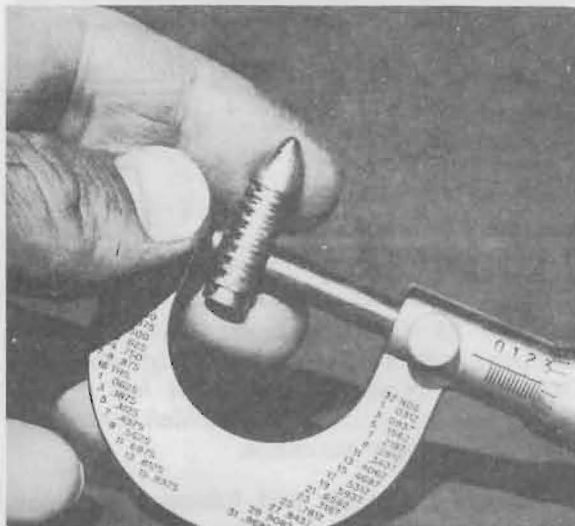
Bullets should be miked after coming out of the mold. Reducing diameter by more than .003" in the die will probably distort the bullet and ruin accuracy.
